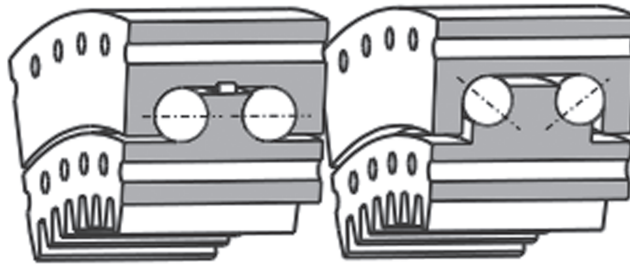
Ball bearings with special rolling element arrangement for improved stiffness behaviour and load accommodation
